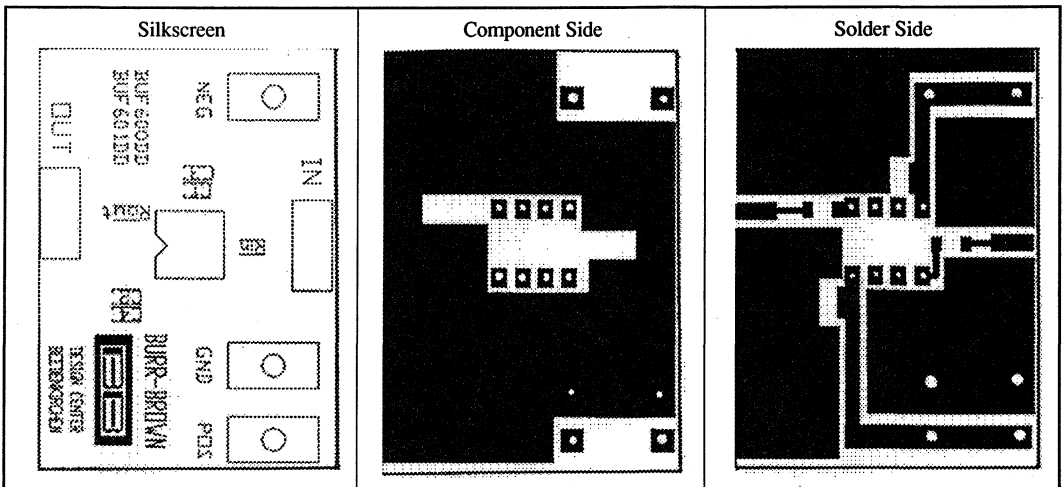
Silkscreen and Board Layouts DEM-BUF600-1GC/DEM-BUF601-1GC (DIP package.)
